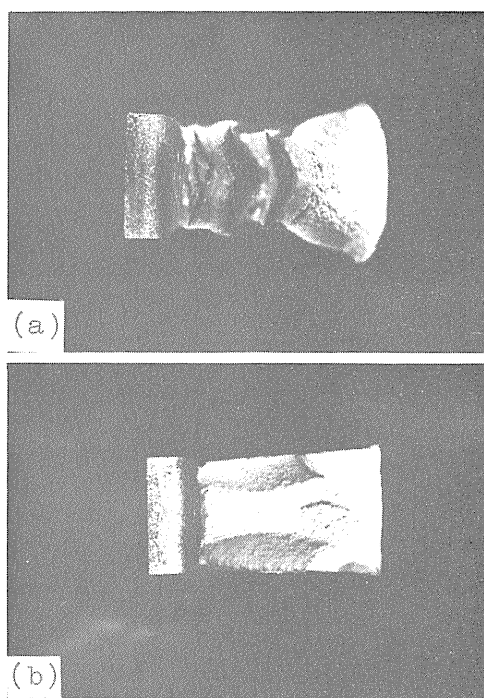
Fracture appearance of modified-ausformed specimens tested at room temperature (steel SNC2).
